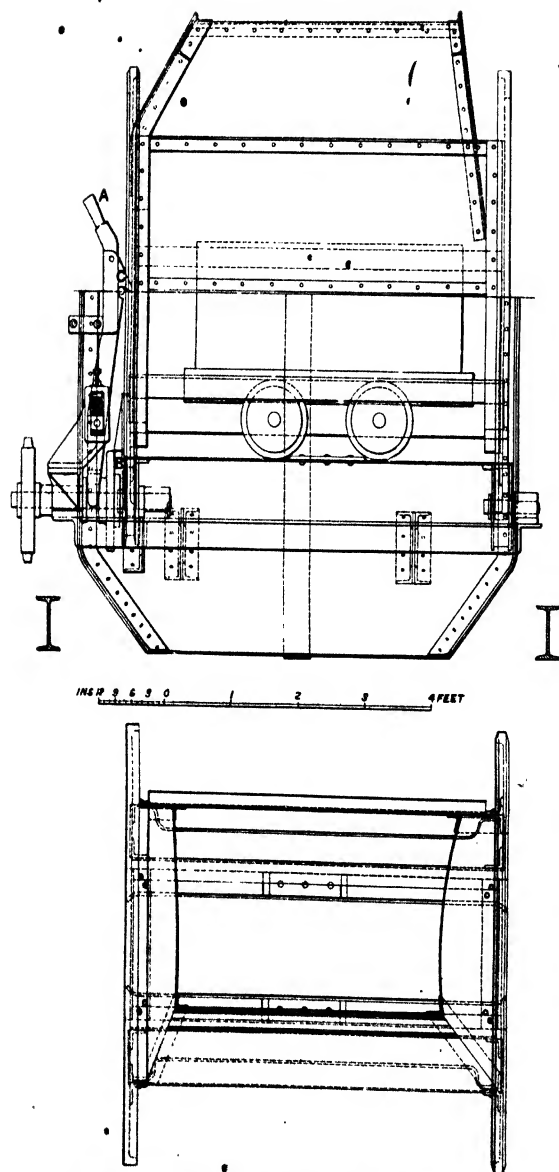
Friction-driven side tippler. Plan and side elevation.
